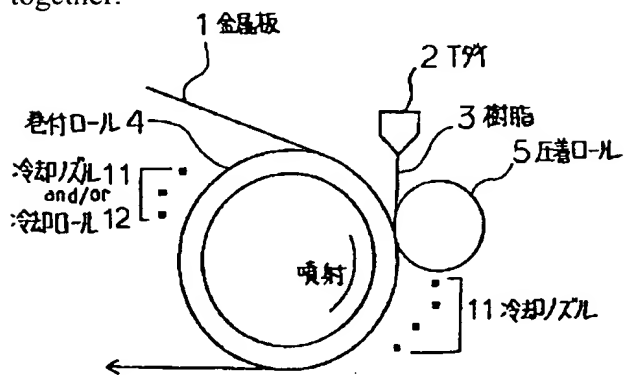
Explanatory drawing showing the embodiment of a gas injection.
